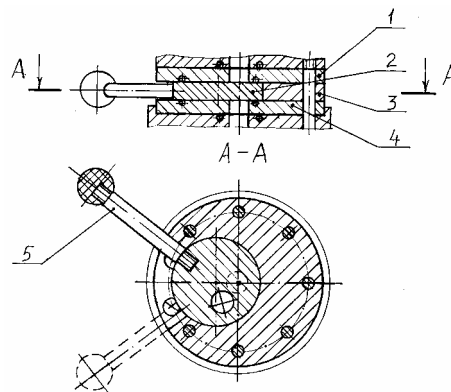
Slide valve. (1) Flange; (2) valve; (3) half-ring; (4) flange; (5) handle.
